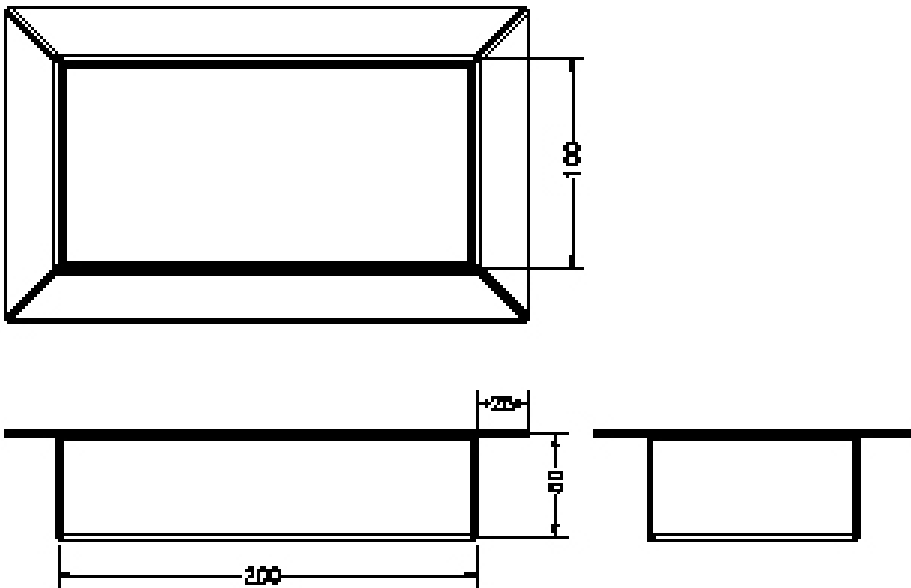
Views and dimensions of the sheet metal component for Exercise 1
